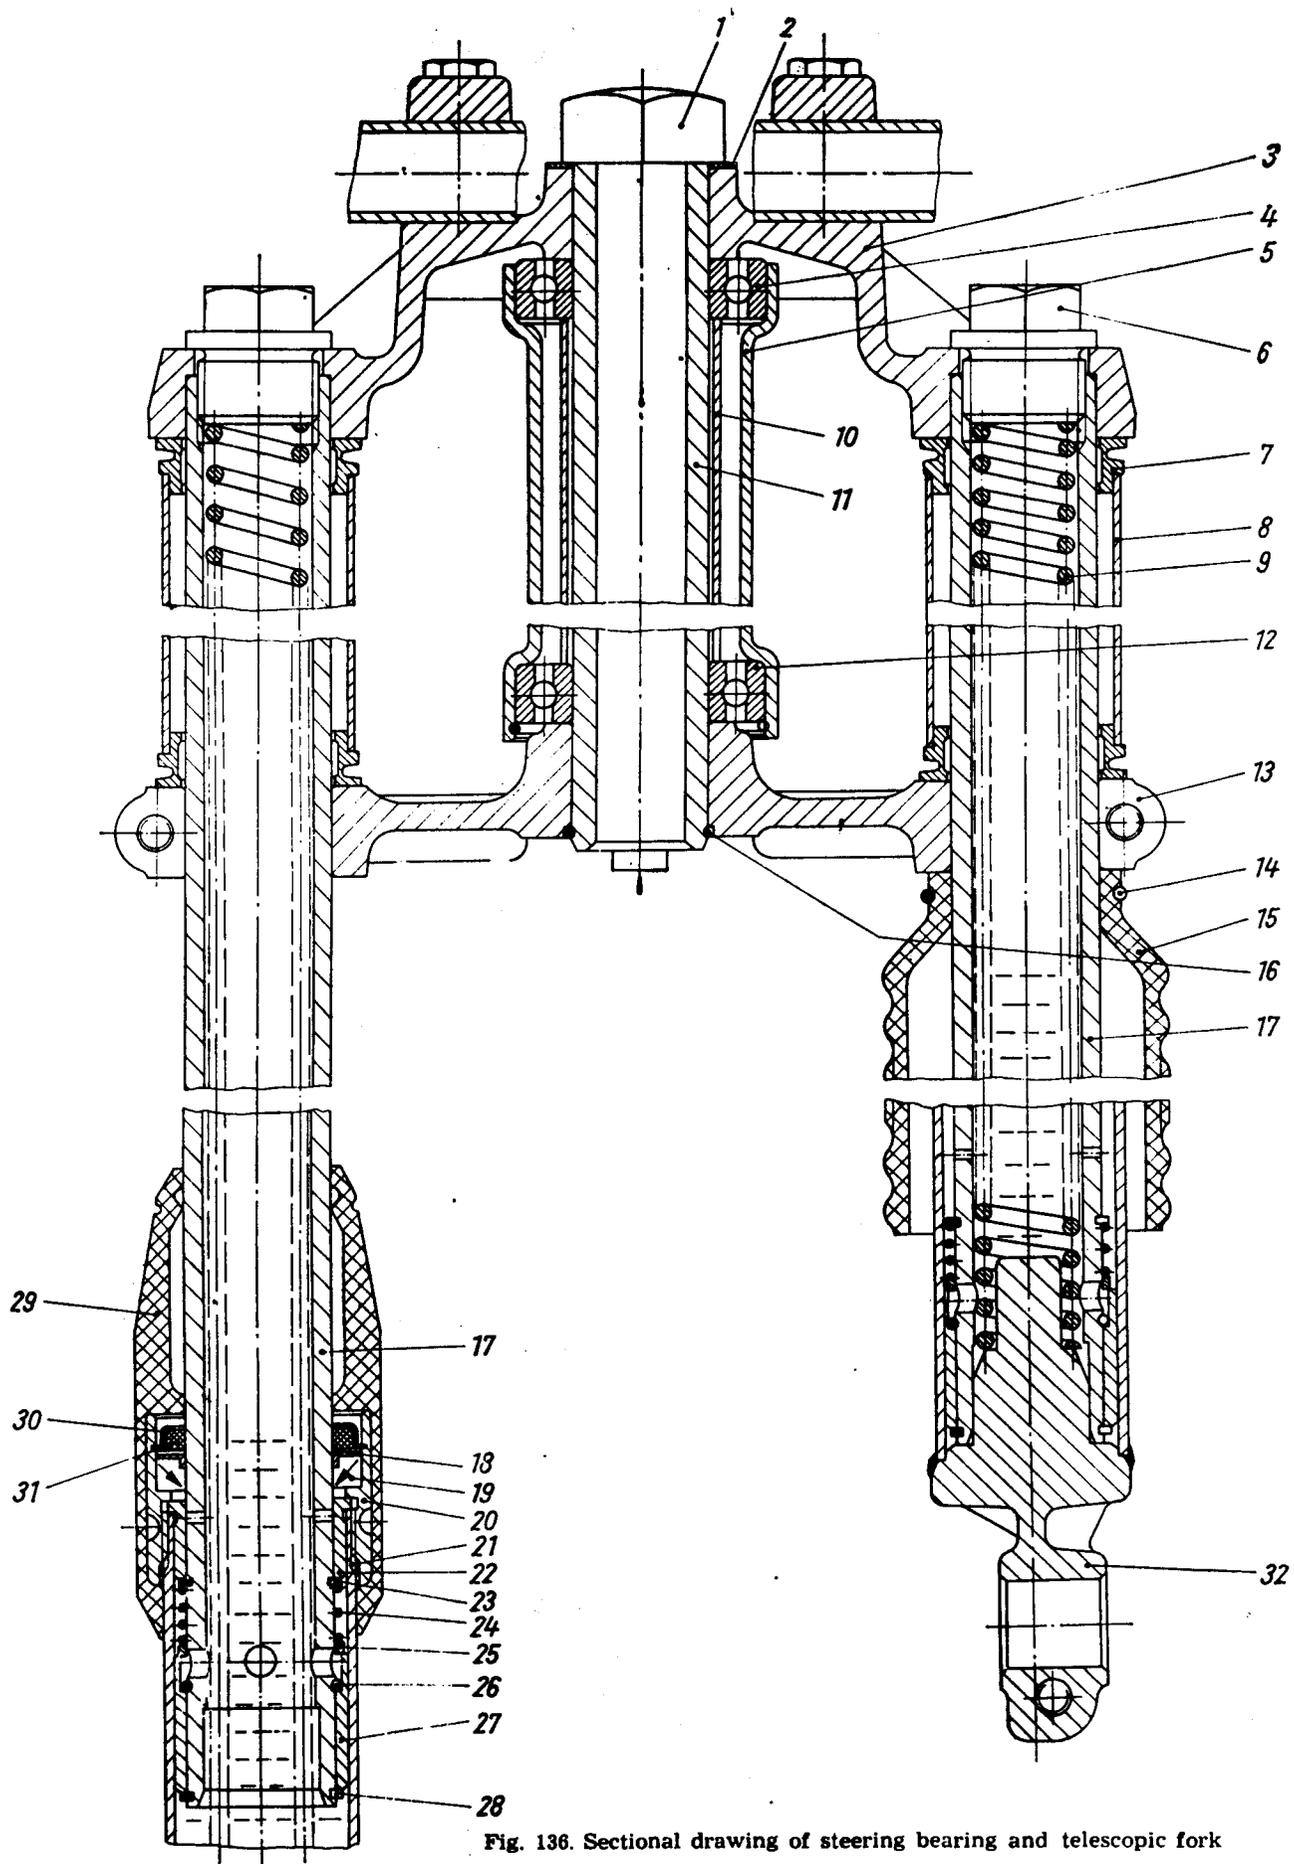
Sectional drawing of steering bearing and telescopic fork
